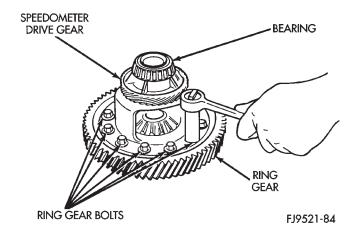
Remove or Install Ring Gear Bolts and Ring Gear
